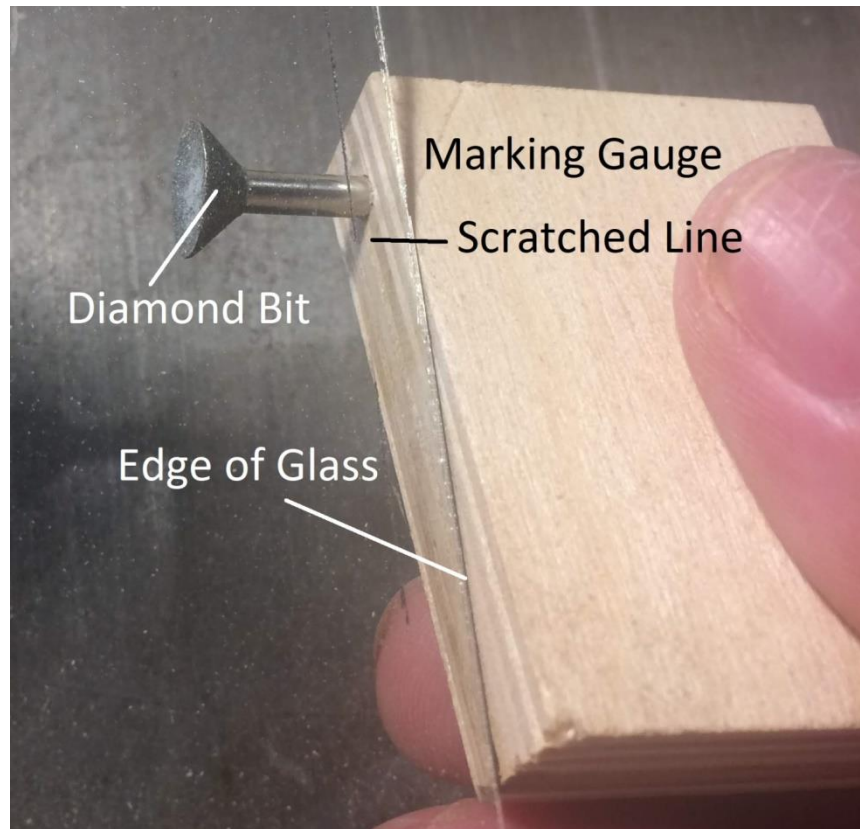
A simple marking gauge for scratching a reticle line into a piece of glass. The edge of the glass acts as a guide for a straight line. The diamond bit is pulled out for clarity.
